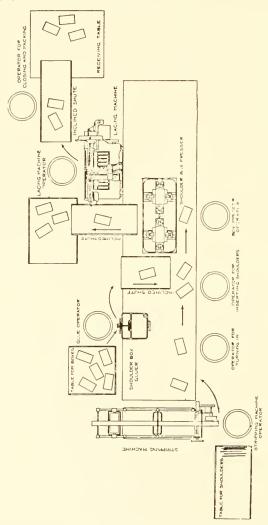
Fig. B. Another special grouping of machines and operators for shoulder stripping and turning in, box gluing and inserting shoulders, pressing and turning.
